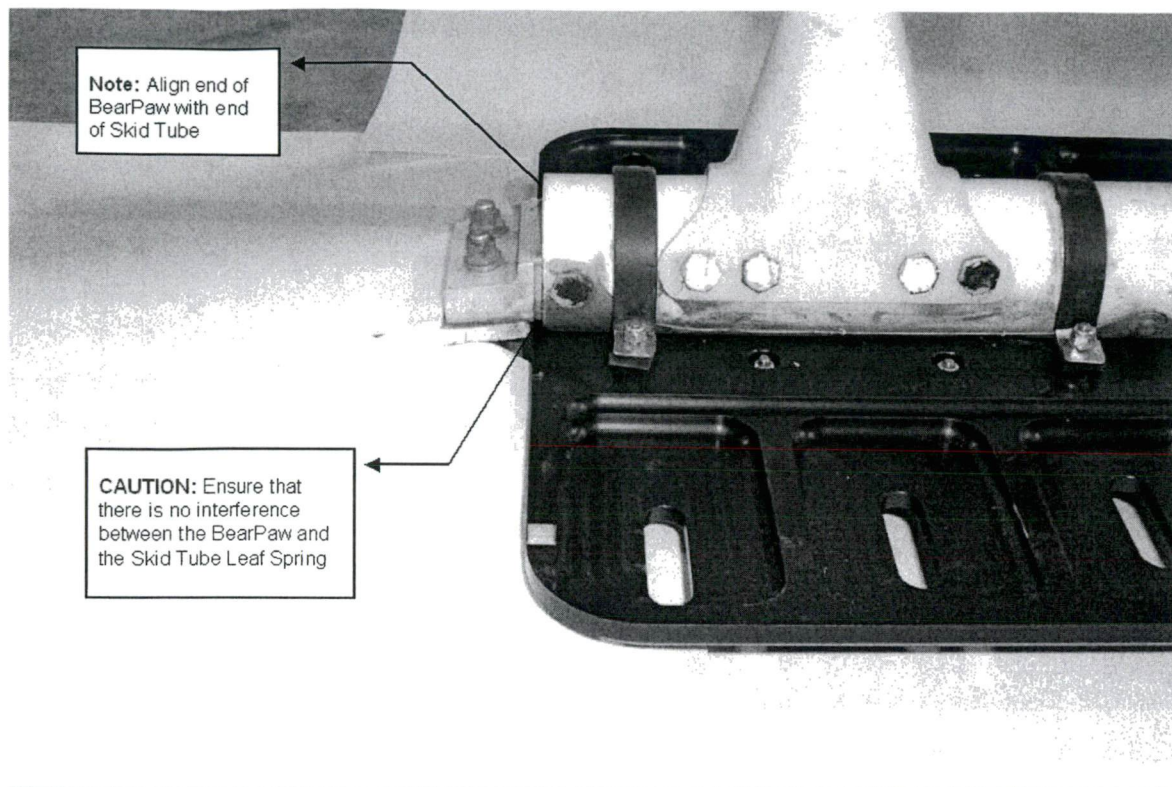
BearPaw Model BP350 (P/N 112-0002-00 or P/N 112-0002-00-S) - Alignment on Skid
